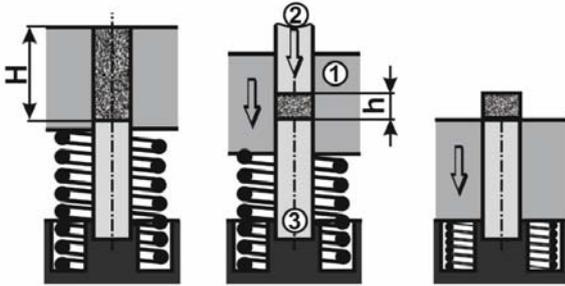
Scheme of double-sided pressing with movable die and fixed lower punch
